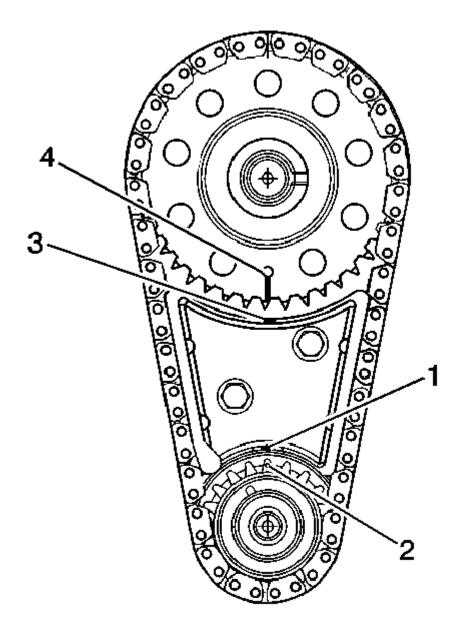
View Of Timing Chain Dampener & Bolts Courtesy of GENERAL MOTORS CORP.
